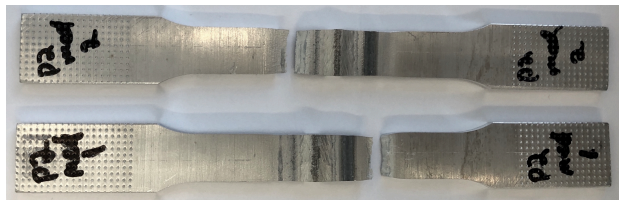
Fractured specimens with longitudinal laser of 2600 W, without PWHT.
